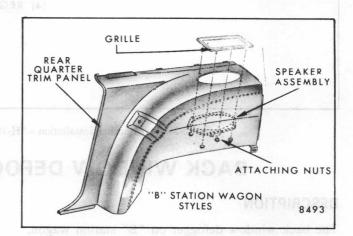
Rear Speaker Installation - "35, 45" Styles
